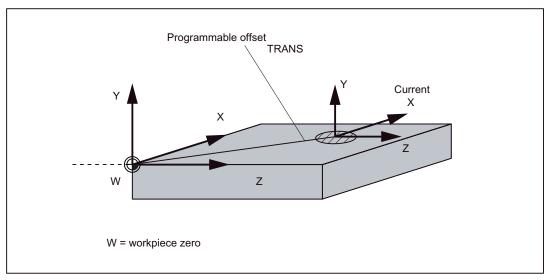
Coordinates on the workpiece; current workpiece coordinate system
